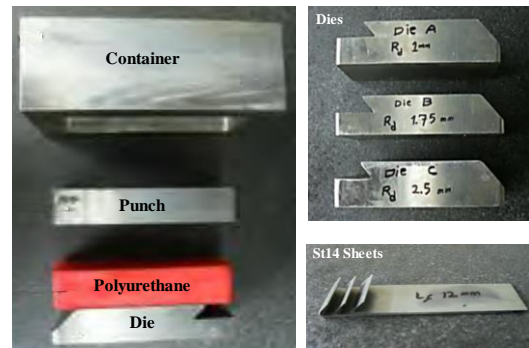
Set-up of 135° bending die with the flexible tool as well as dies and bent sheets [8]
